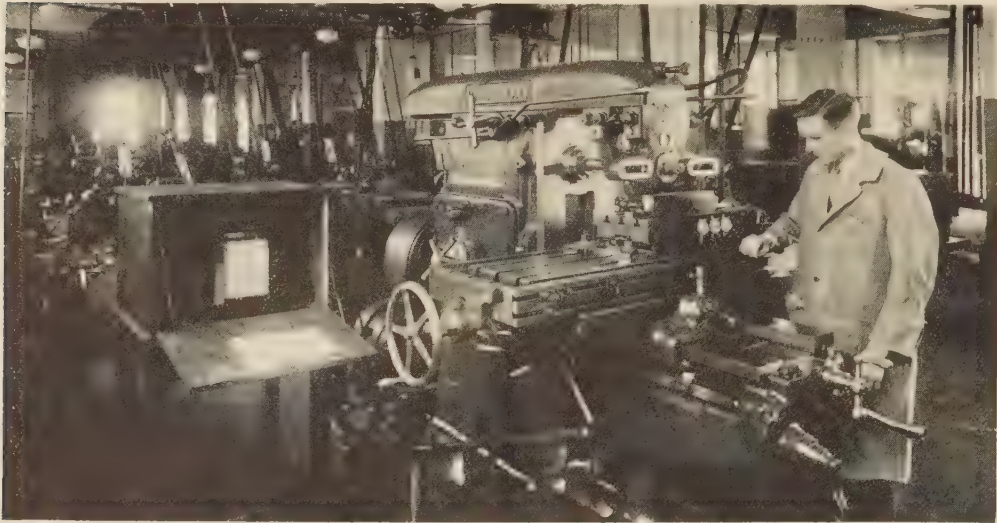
THE MILLING MACHINE, WATTMETER, AND DYNAMOMETER USED IN THE TESTS
